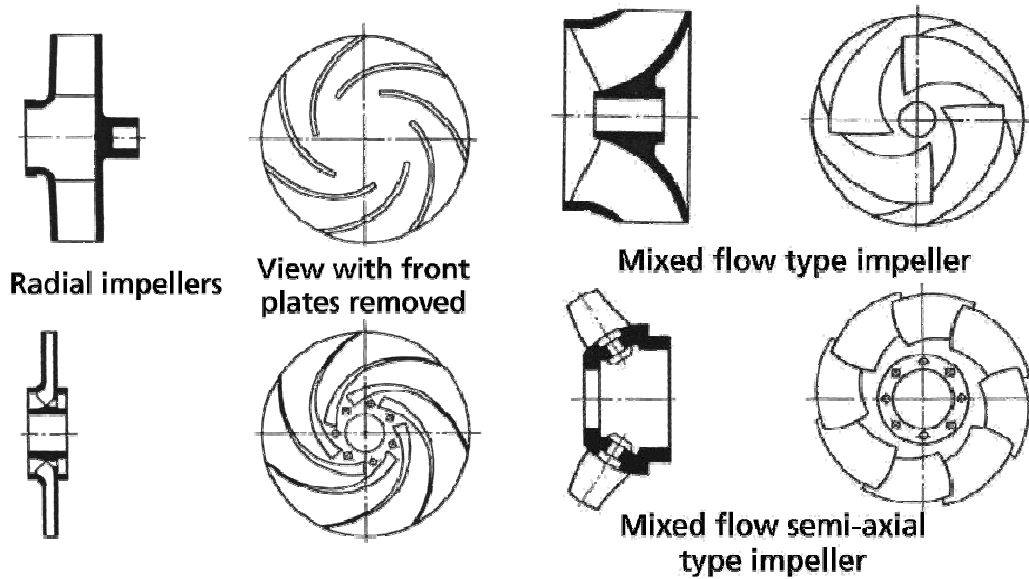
radial and half-radial pump impellers (<http://www.pumpfundamentals.com/impeller.htm>).
